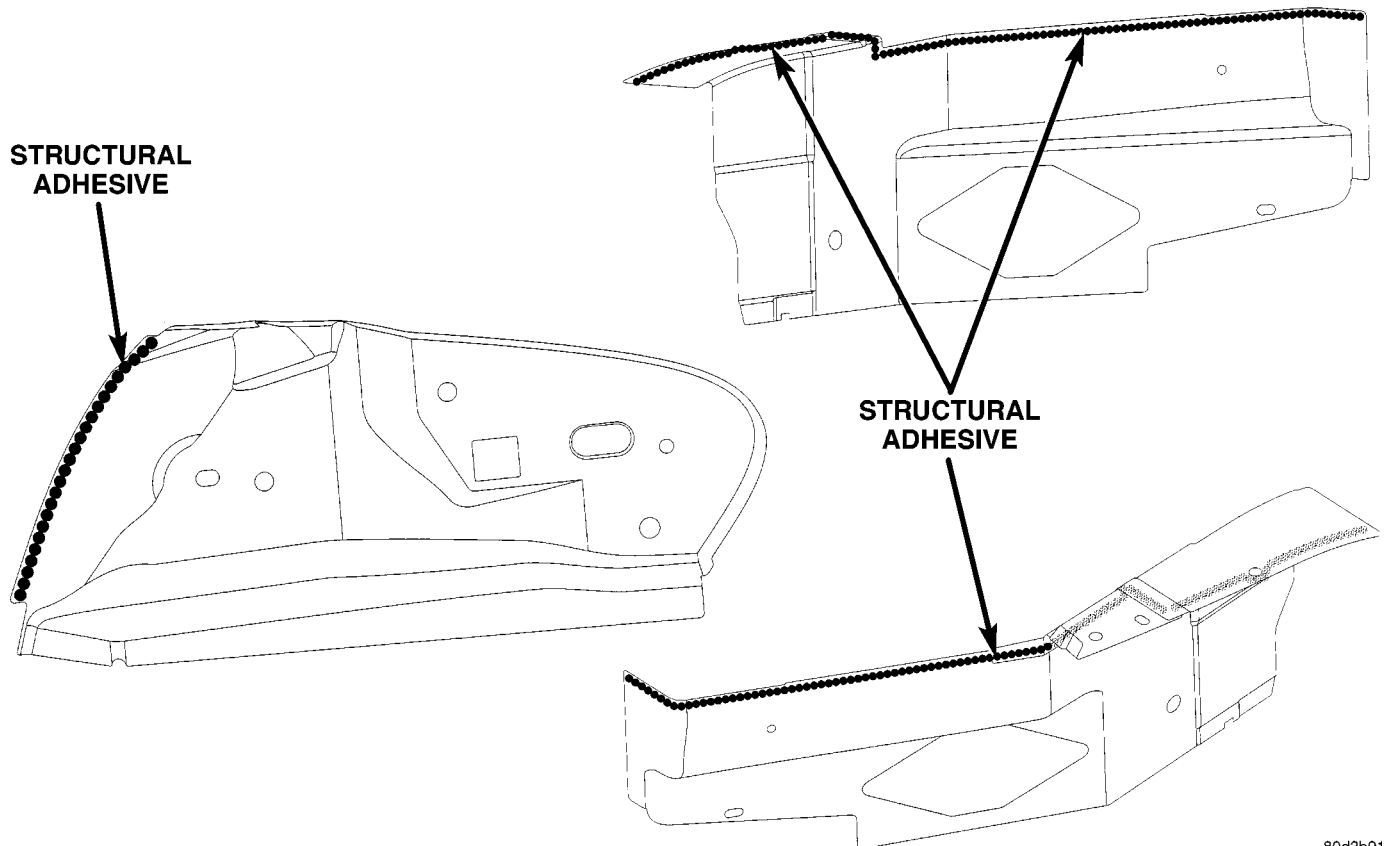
LOWER QUARTER EXTENSION, TAIL LAMP CAN & OUTER QUARTER FILLER
